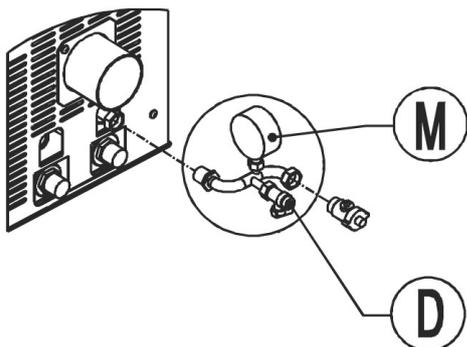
End piece with a filling tap (D) and pressure gauge (M) (Accessory)
